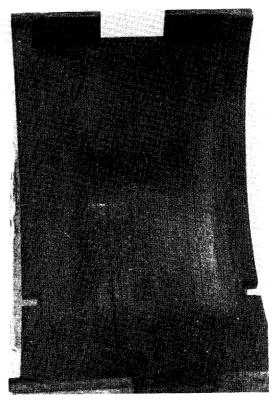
Lighter corrosion products on a bearing from a 'Leander' class frigate
